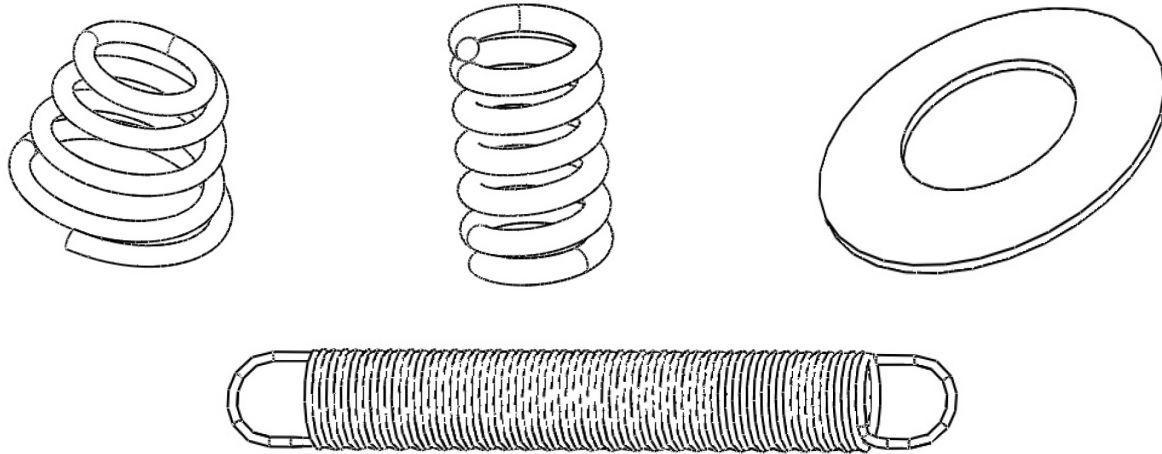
Compression springs (top left/center), Belleville spring (top right) and compression spring (bottom).
